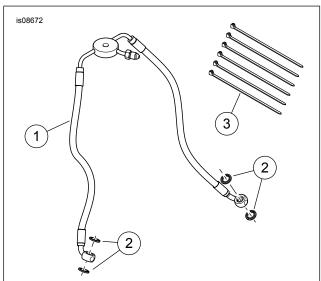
Service Parts: Non-ABS Dual Disk Lower Brake Line
